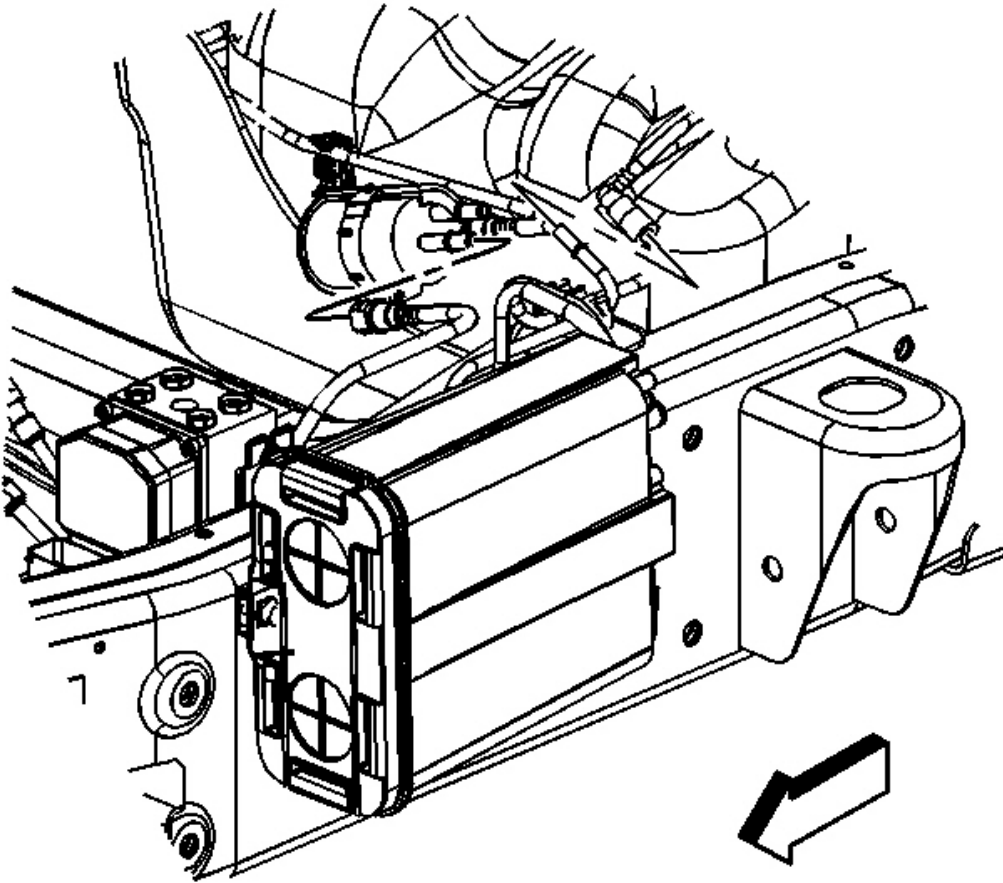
Chassis Fuel Feed Hose & Fuel Filter
